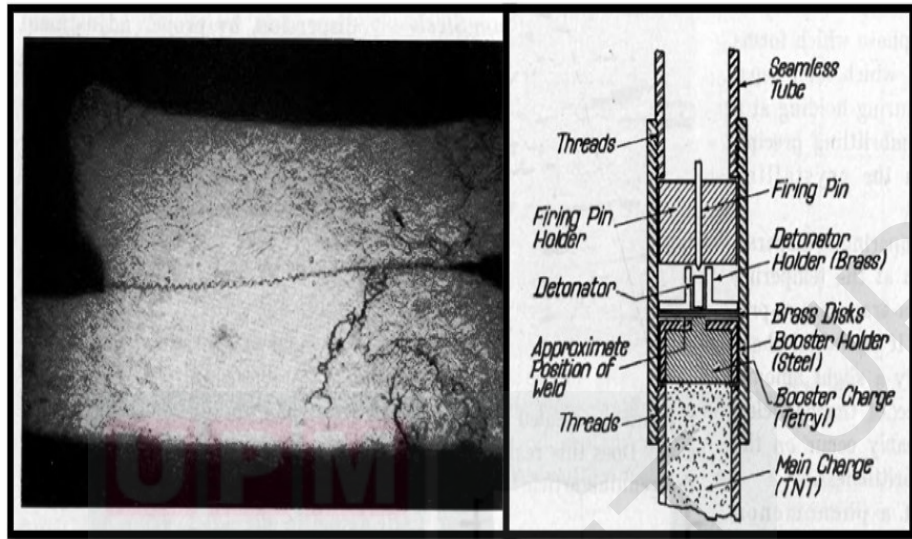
The initial publication of explosive welding by Leroy Carl. The left side displays Carl's welded half-hard brass samples. The right side presents a schematic of the setup where the incident took place, with the brass disks bordered in red by the author (Arnett, 2019)
